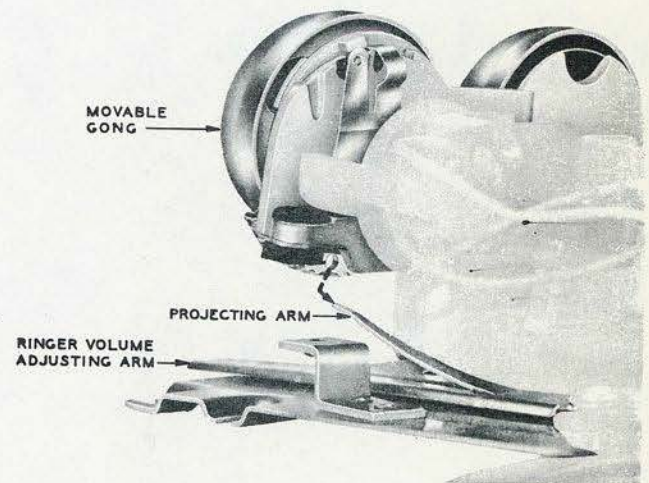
Assembly of C4A Ringer in 685-, 6-, 7-, and 8-Type Subscriber Sets, Side View
